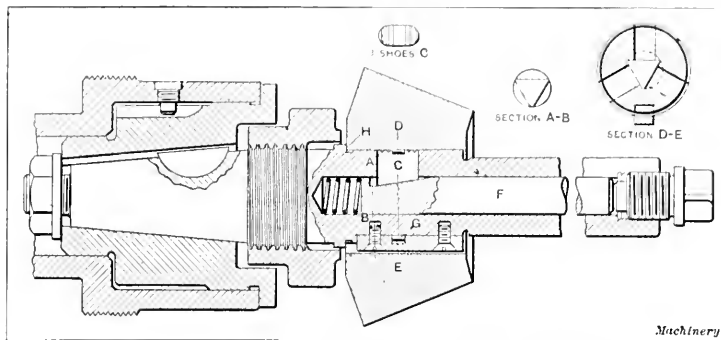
Arbor for Pinion Blanks, equipped with Three Expanding Shoes
